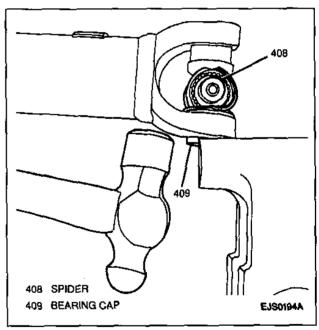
Removing Bearing Cap from Propeller Shaft Yoke
